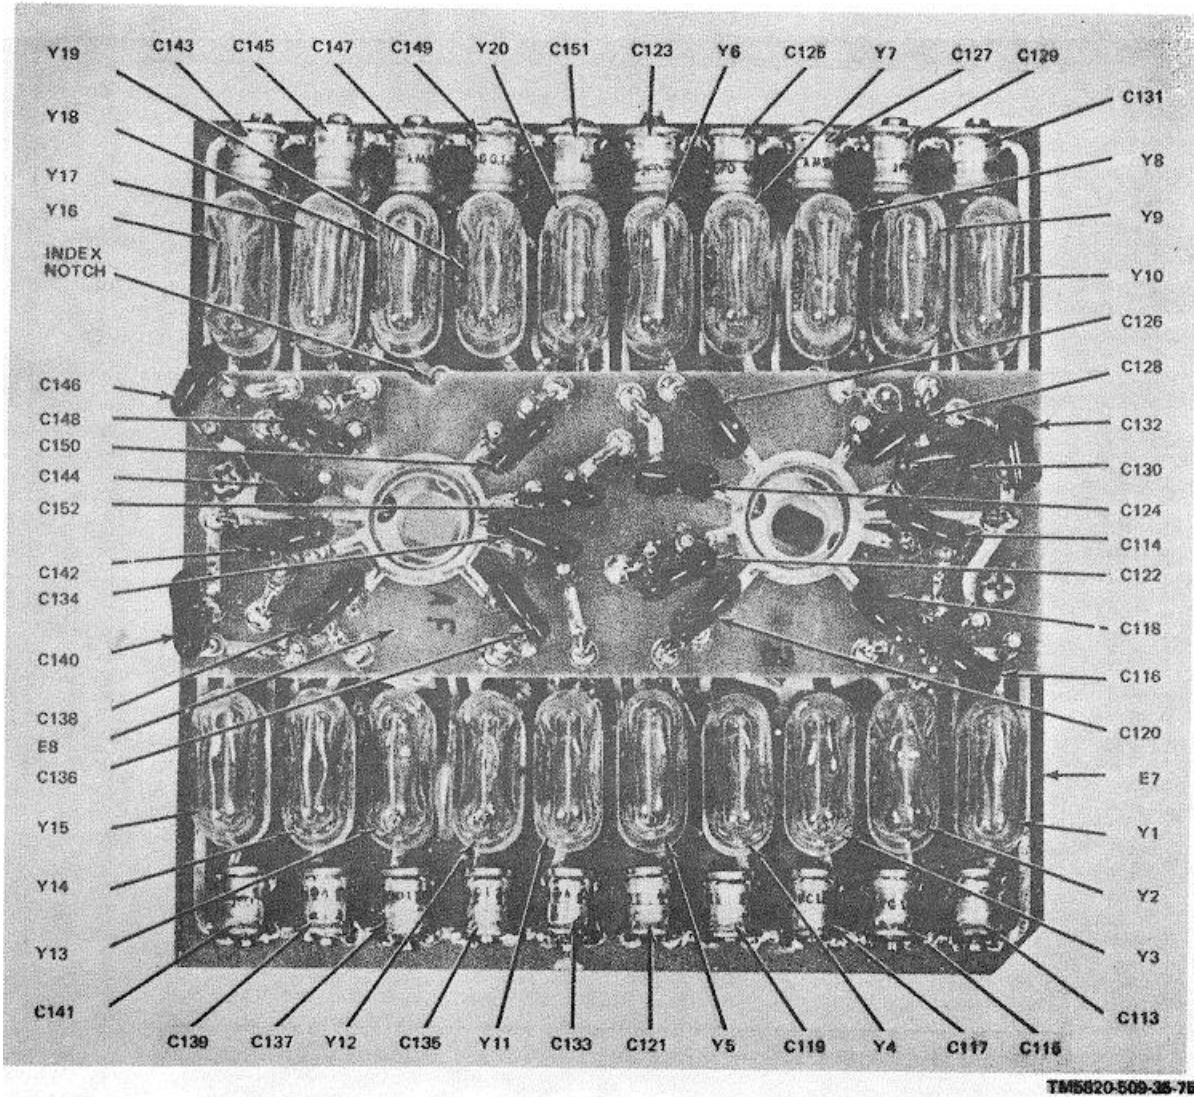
Oscillator Control C-4311/PRC-47 (A8A7), Card Assemblies E7 and E8, Front View.
